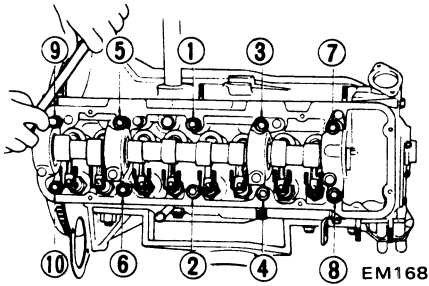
Tightening Sequence of Cylinder Head Bolts
